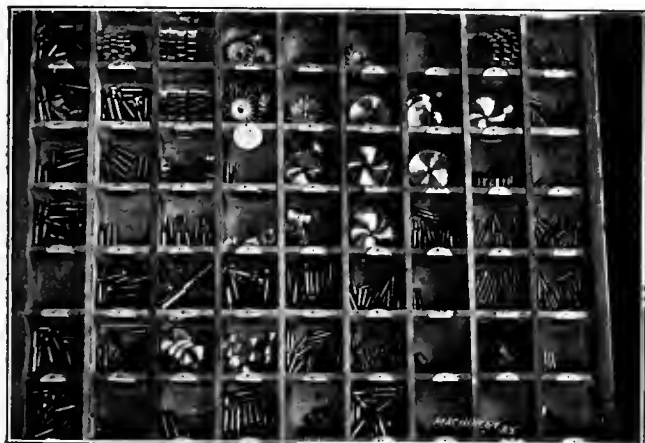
Drawer Filled with Miscellaneous Tools used in Watch Construction
